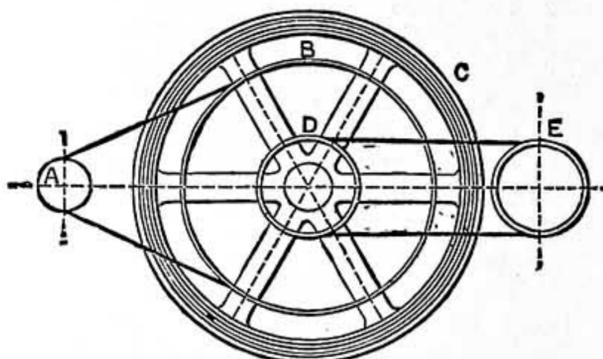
Fly Wheel connected with Motor and Lathe Head—A, Pulley Wheel on Motor, 3 in. in diameter; B, Driving Wheel of Fly Wheel, diameter 18 in.; C, Heavy Rim of Fly Wheel, diameter 28 in.; D, Smallest Rim of Fly Wheel, diameter 6 in.; E, Pulley Rim on Lathe, diameter 6 in.
